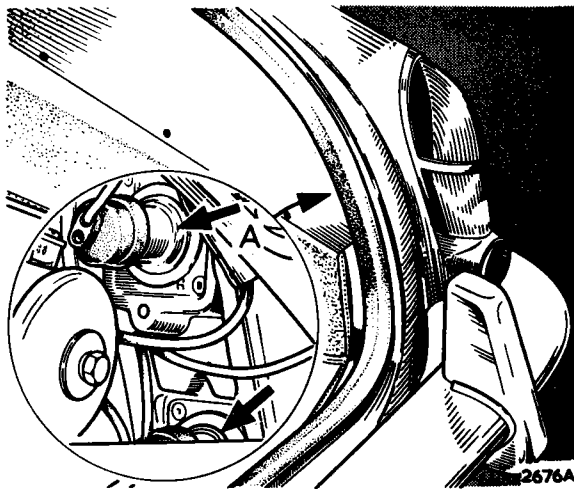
Rear flasher/rear light/brake light bulb removal
